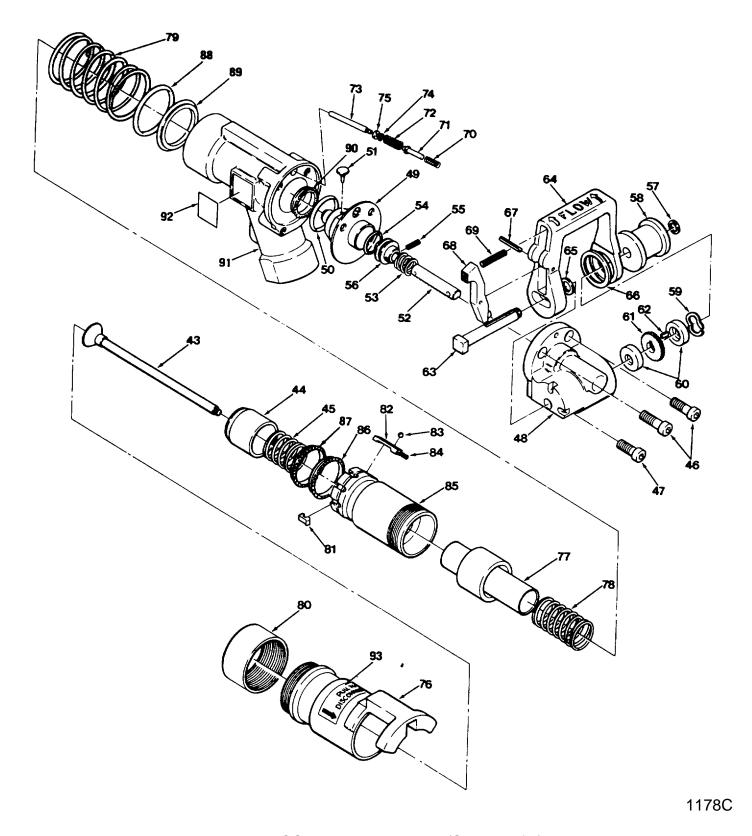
CCR Nozzle Assembly (Sheet 2 of 2)
